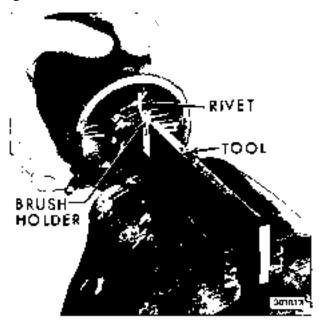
B-13 Brush Holder and Rivet Installed on Tool
